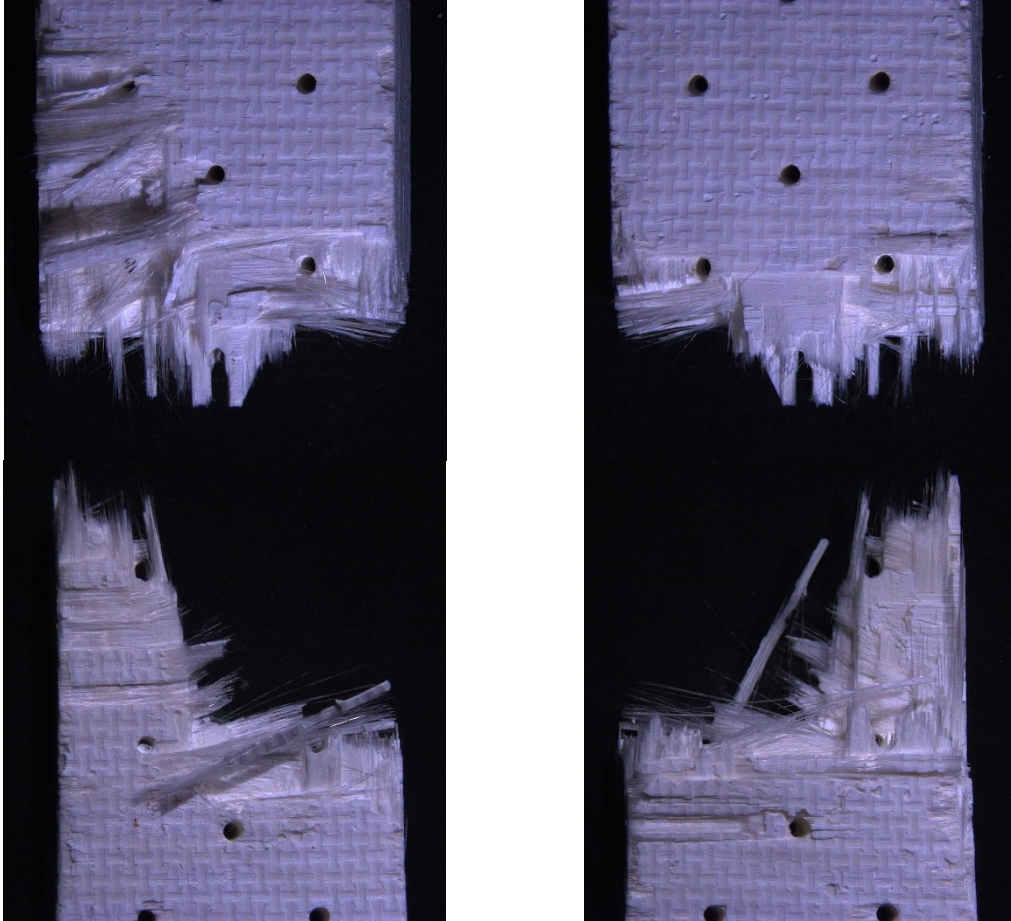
Top and bottom fracture surfaces of specimen #3, tested in tension to failure at 1200°C in air
